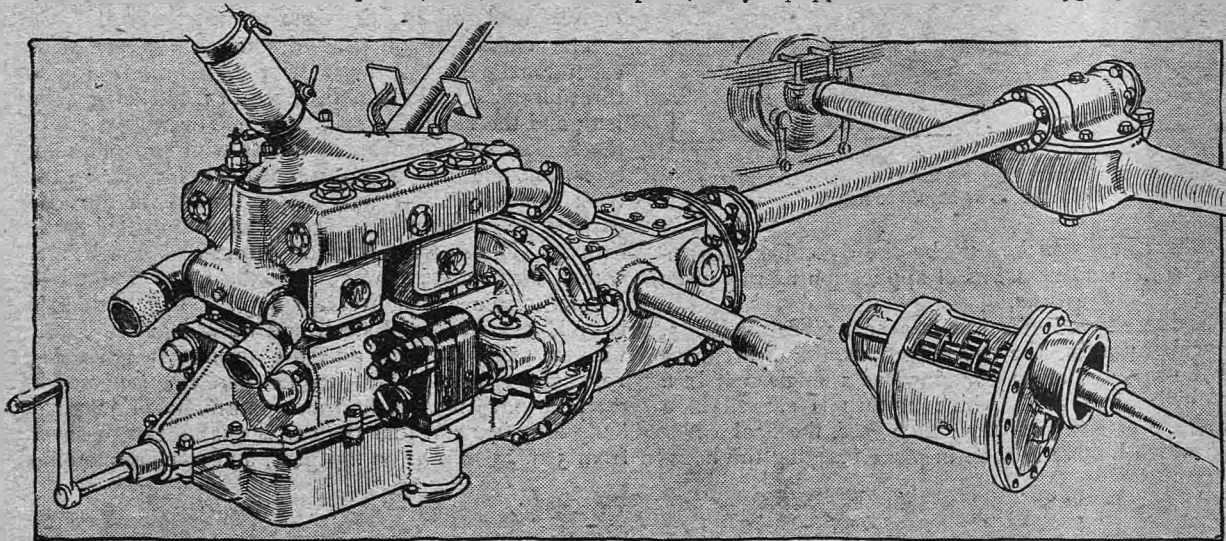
The Morris-Oxford engine and transmission. Detached is the shell carrying the gears; clutch-stop and half of the socket for the spherical head of the propeller-shaft casing.
